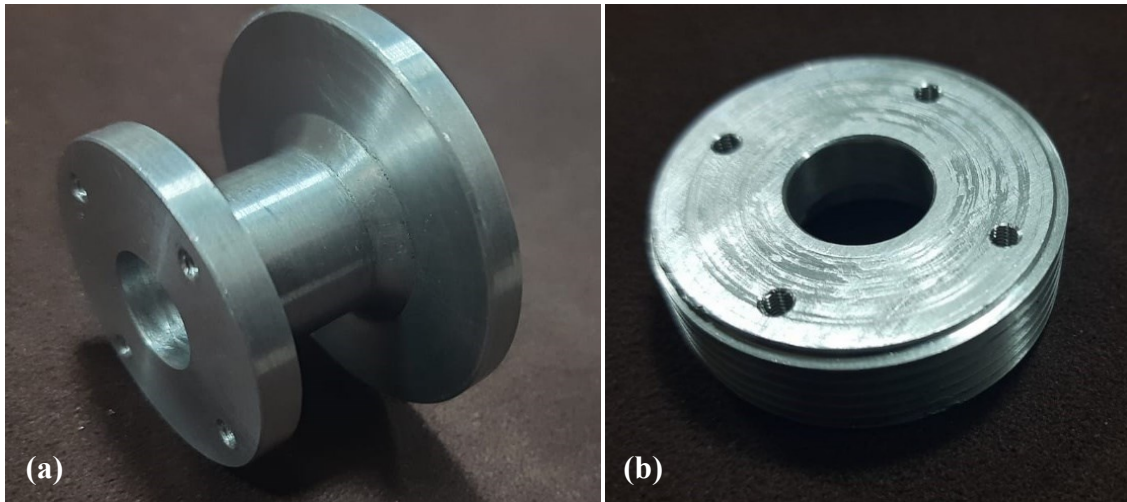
Manufactured outer shaft (a) and grooved pulley (b)
